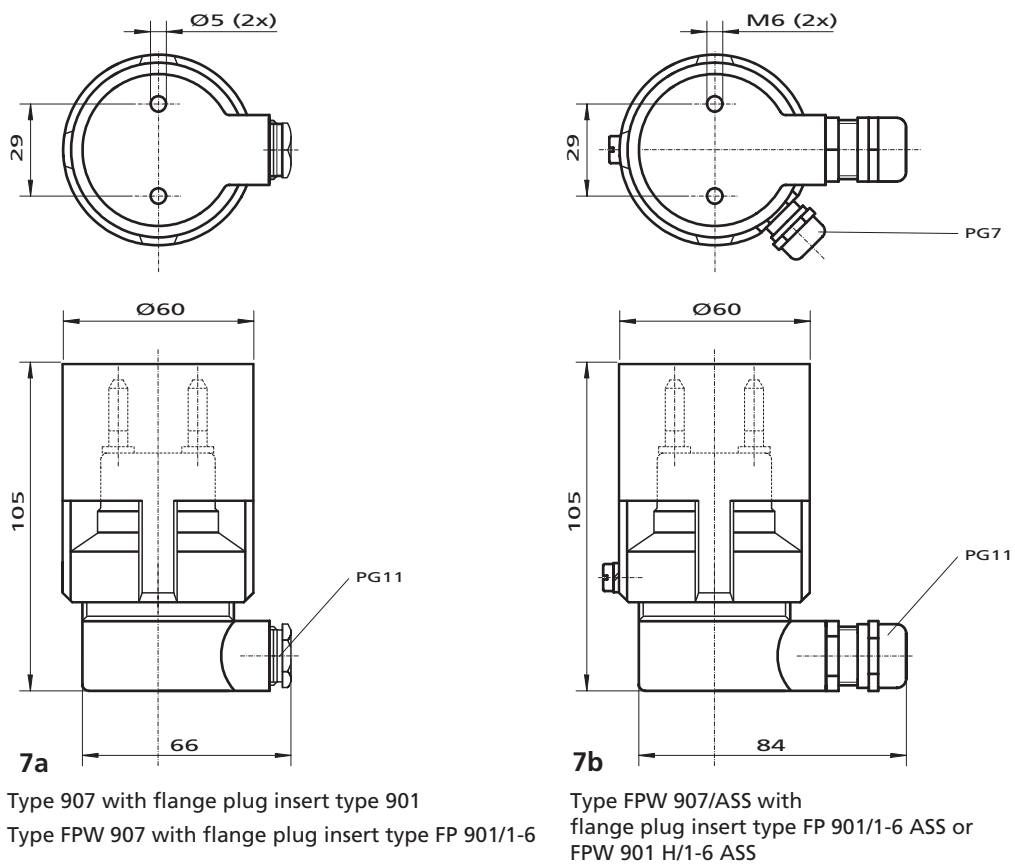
7b: Wall plugs for overfill prevention sensor 83 UV
